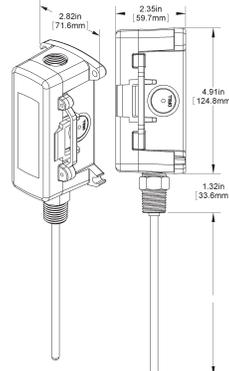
Double Threaded Immersion Sensor in a BAPI-Box 2 (BB2O) Enclosure with "Outside Mount" Configuration.
